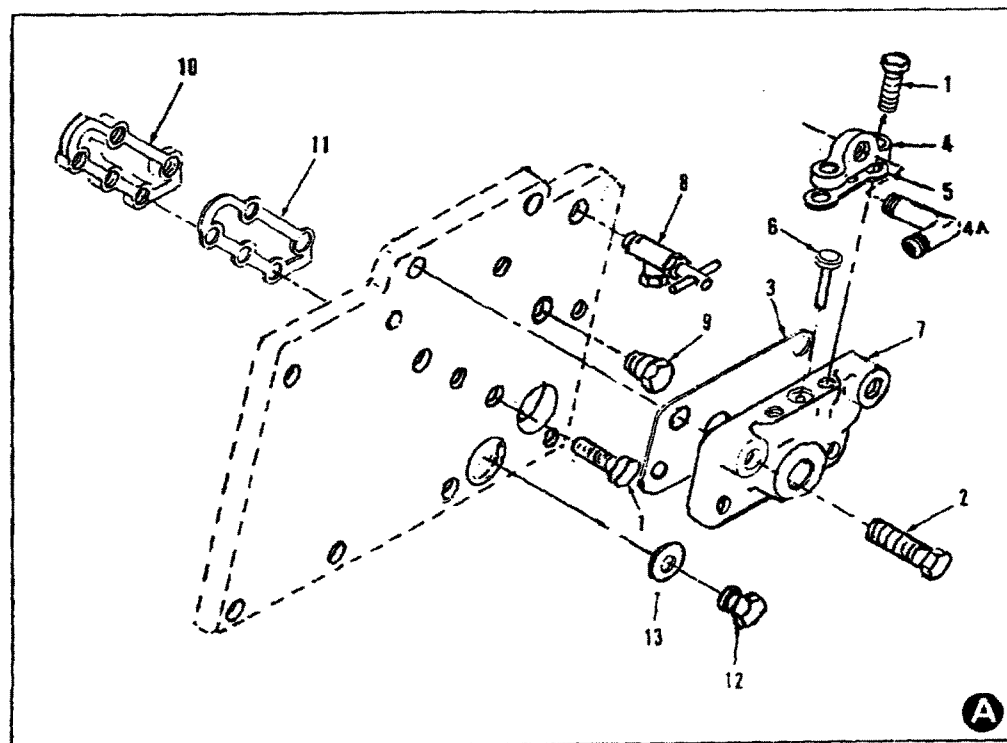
Fuel Injection Pump (Sheet 2 of 4)
